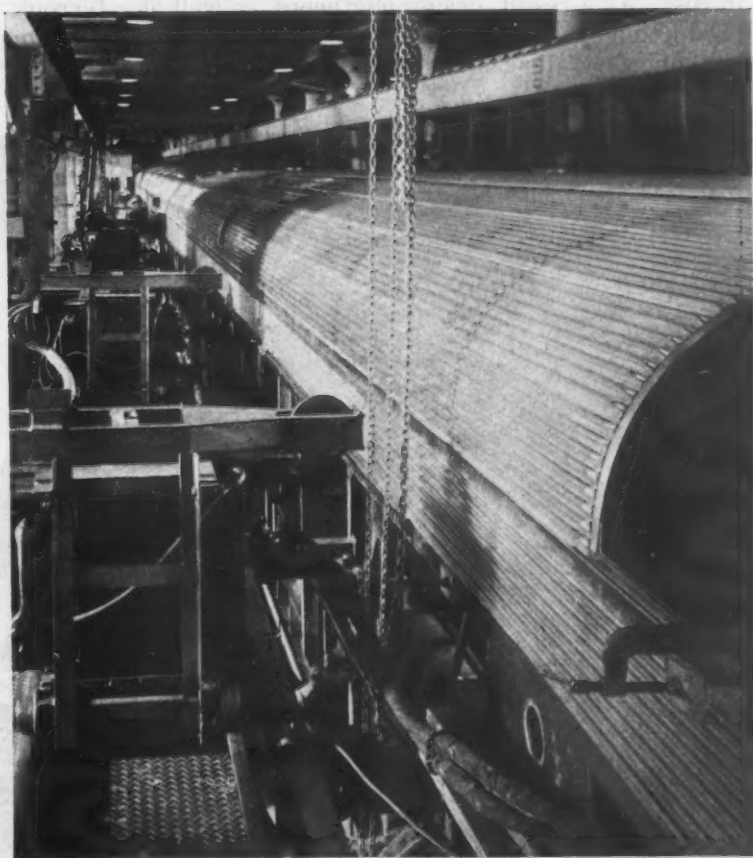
Weld Recorders Aid in Maintaining the Uniformity of the Spot-welds Used to Fabricate This Stainless-steel Railroad Car. Electronic Controls are an Important Factor in the Successful Application of Resistance Welding in This Field
